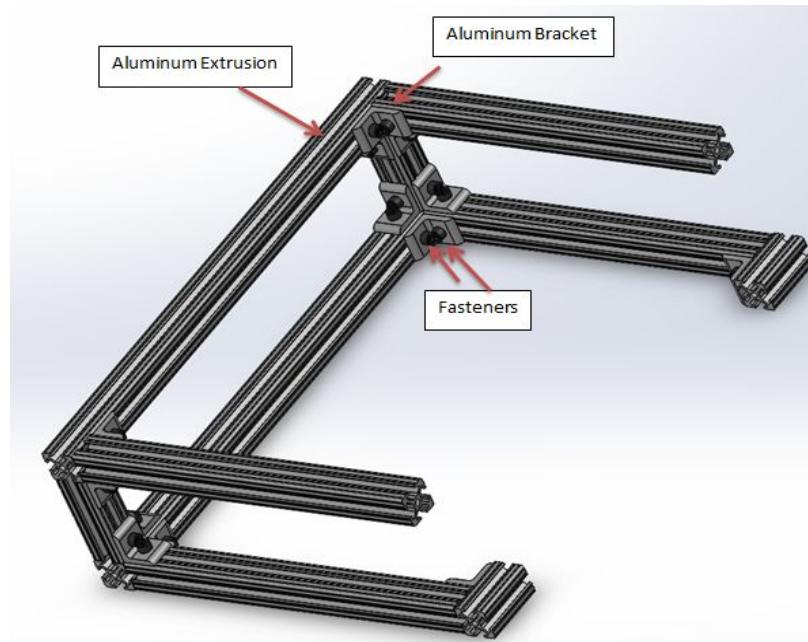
The chassis mount with fasteners and bracket attached to aluminum extrusion
